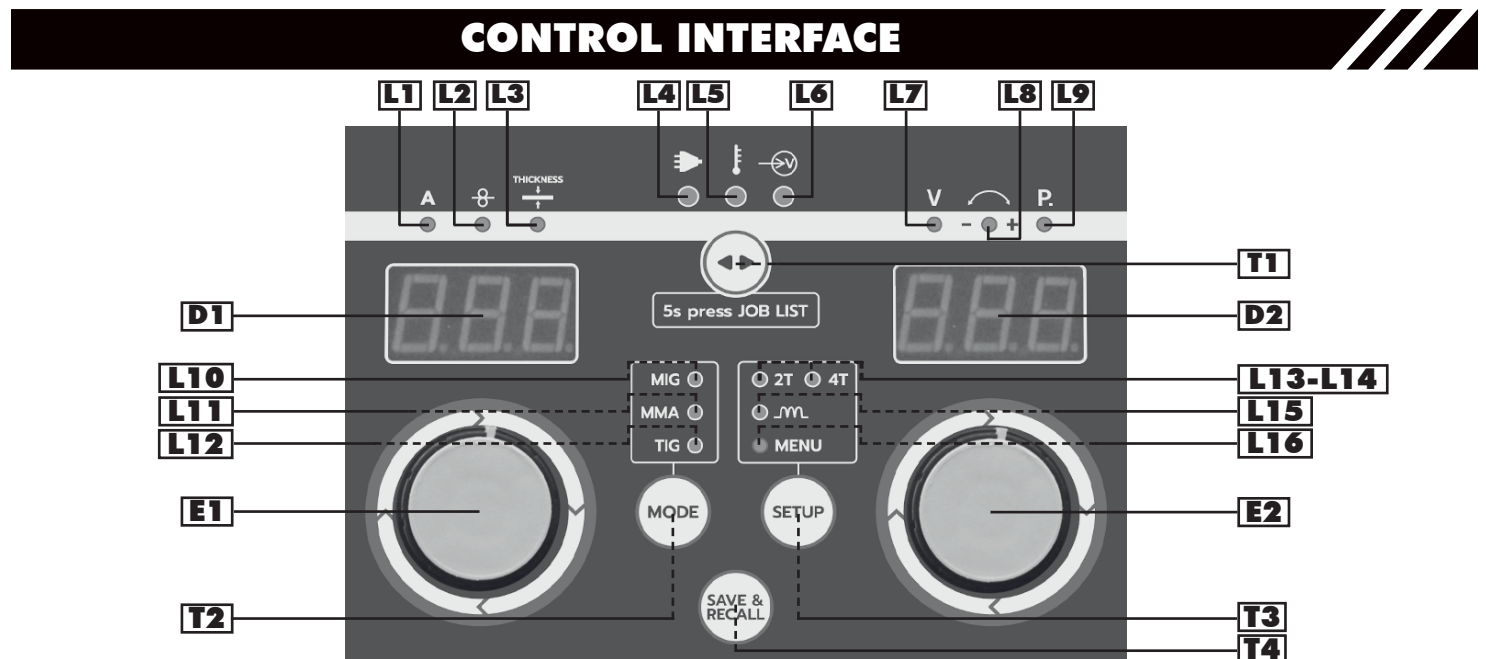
Unitech 328-358C and X4 wire feeder control panel
